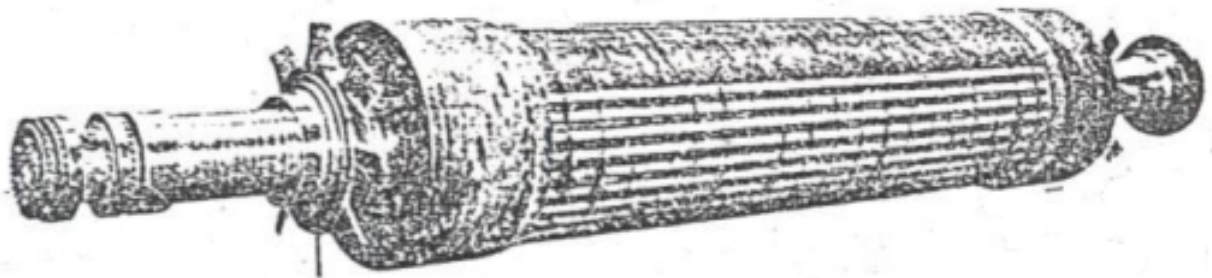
Completed two-pole rotor, showing cooling fans, slip rings, and retaining rings. (*Westinghouse Electric Corporation*)
